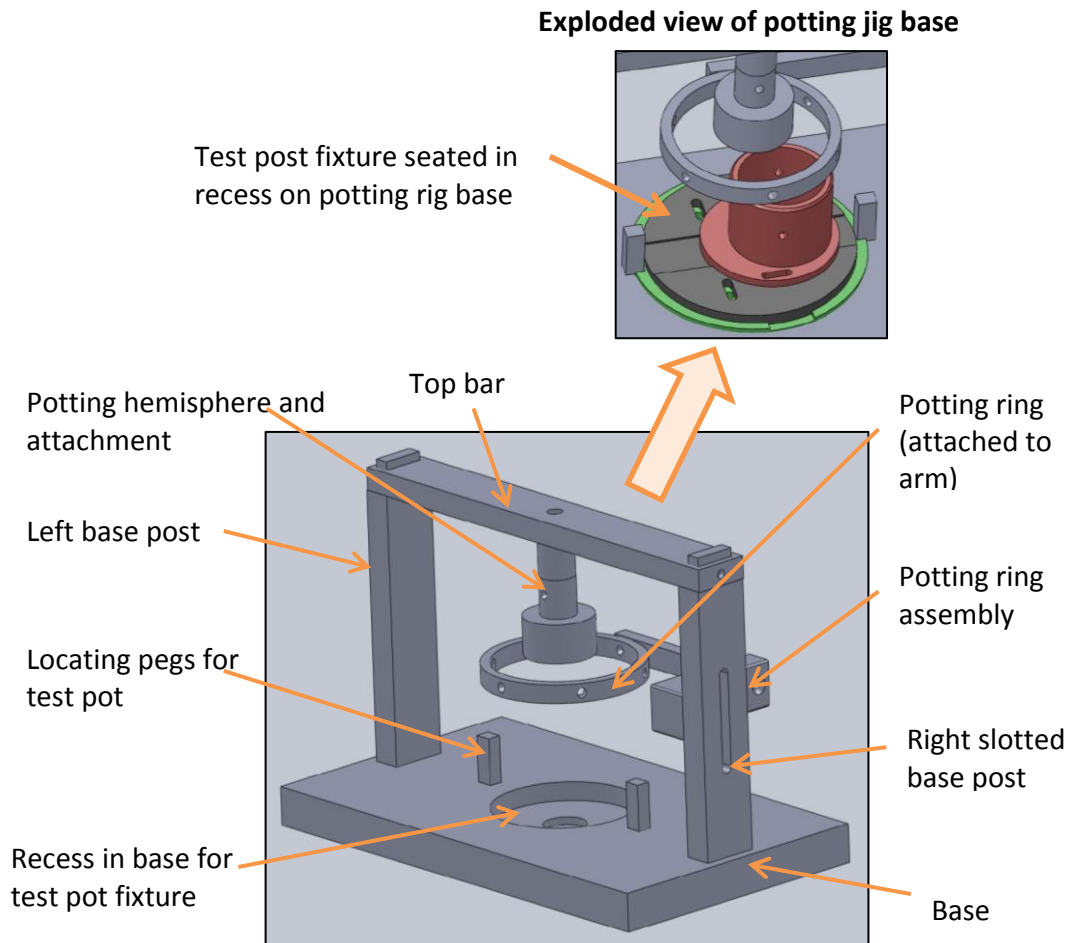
Femoral head potting jig designed using SolidWorks, shown without fasteners, including exploded view of the potting jig base with the test pot fixture *in situ*.
